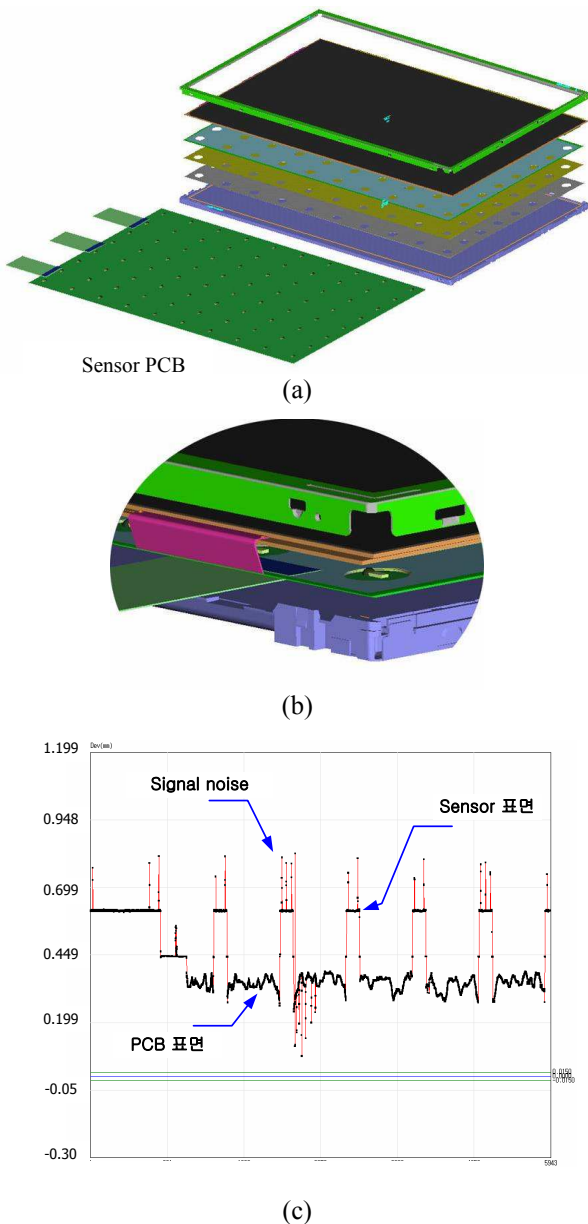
Sensor PCB insertion: (a) sensor PCB assembly schematic (b) magnified-view of sensor position (c) sensor PCB thickness measurement
